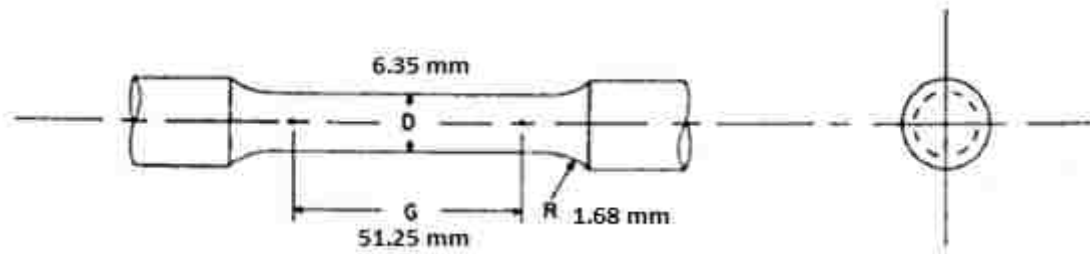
Tensile specimen geometry with gauge length, G, of 51.25 mm, fillet radius, R, of 1.68 mm, and gauge diameter of 6.35 mm
